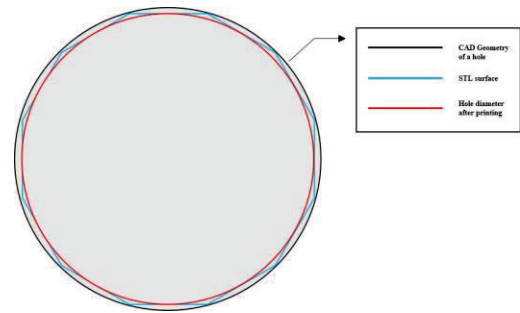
Dimensional changes between CAD geometry and printed geometry.
